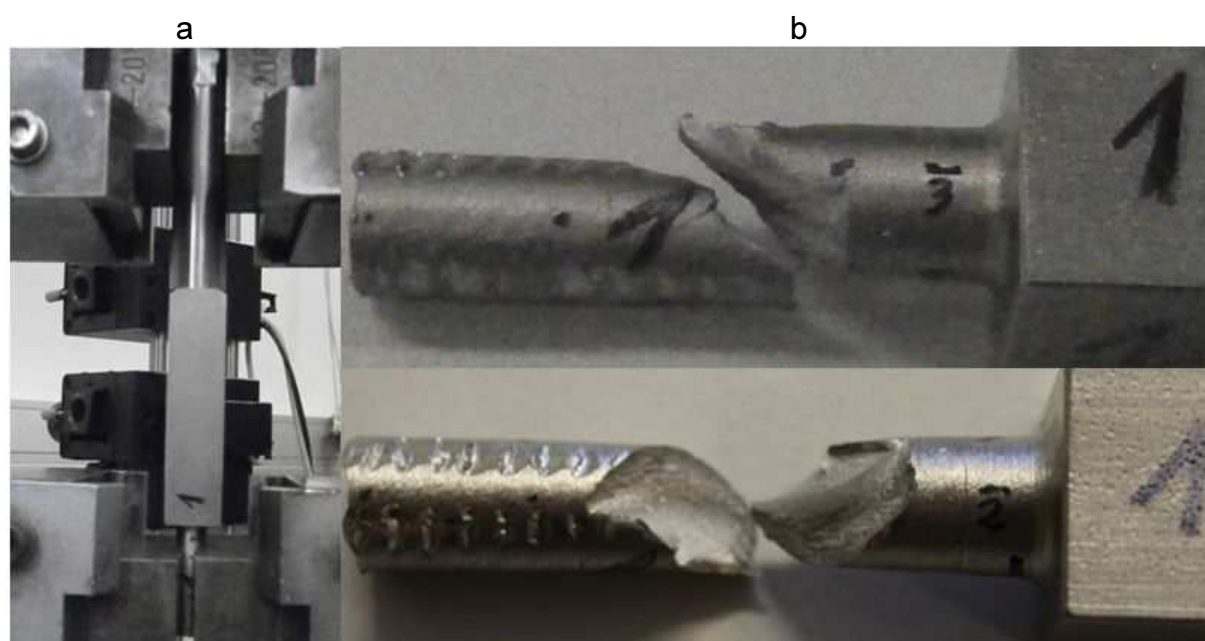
a) Sample 1 mounted in the clamps, b) photographs of the fracture zone
